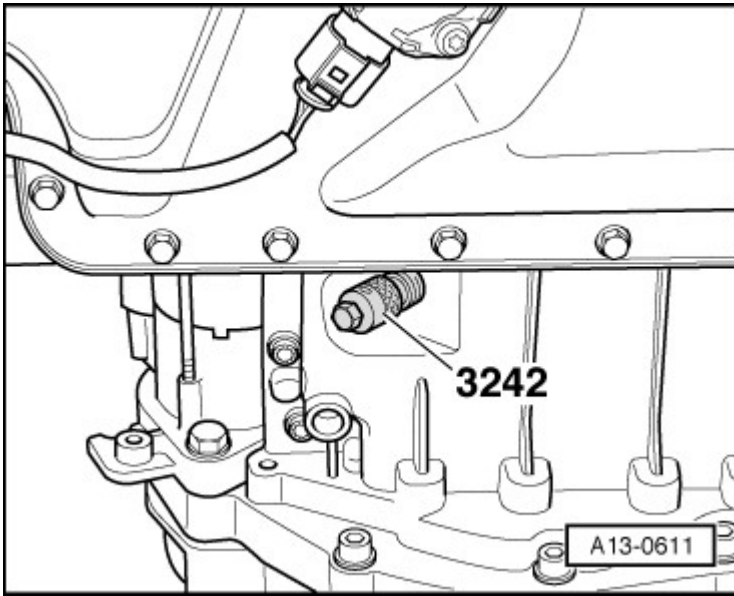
Identifying Special Tool -- Crankshaft Holder 3242
